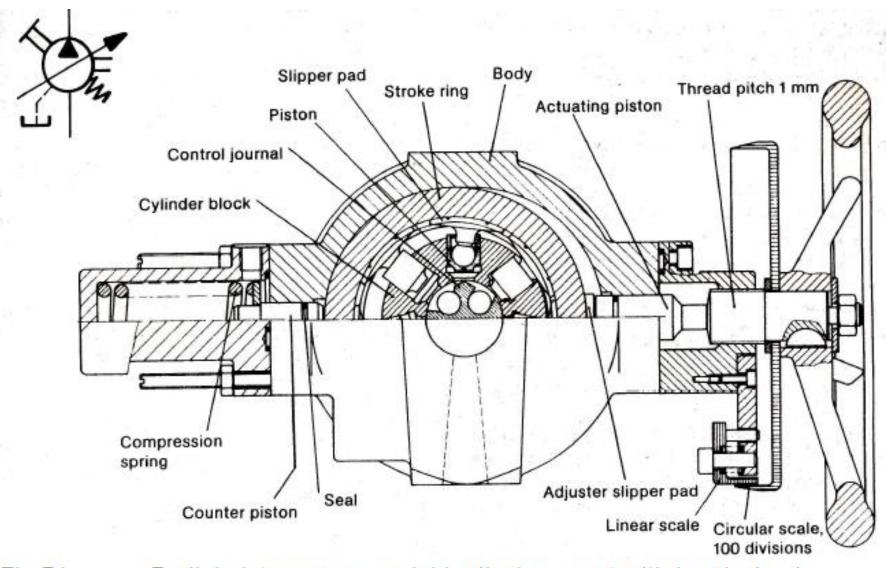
Radial piston pump, variable displacement with hand wheel adjustment
